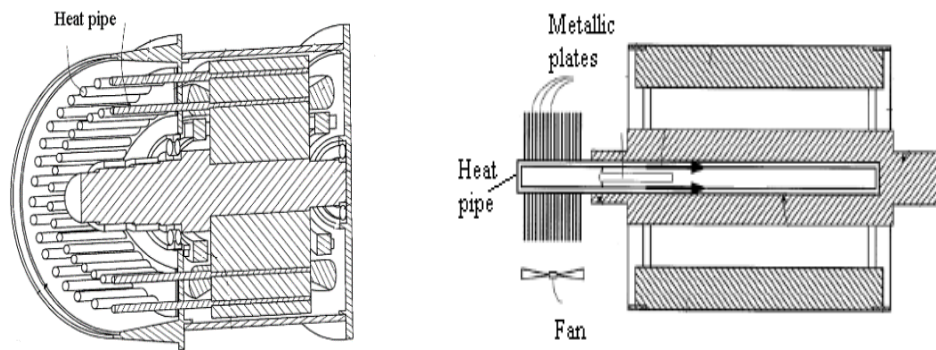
Motor assembly with heat pipe cooling system [71, 73].
